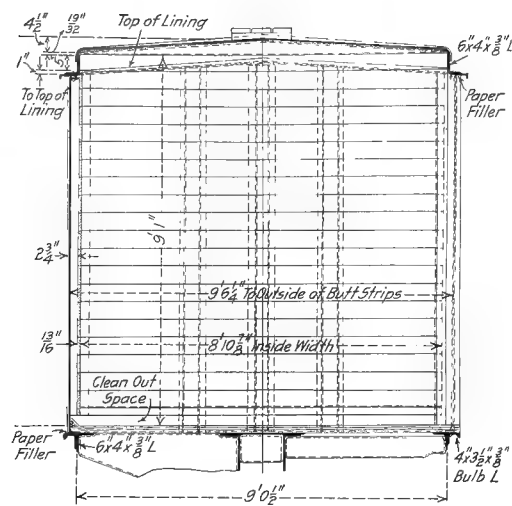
End Sill and Corner Construction of Pennsylvania Railroad Steel Box Car. See also Figs. 7 and 262-265.
